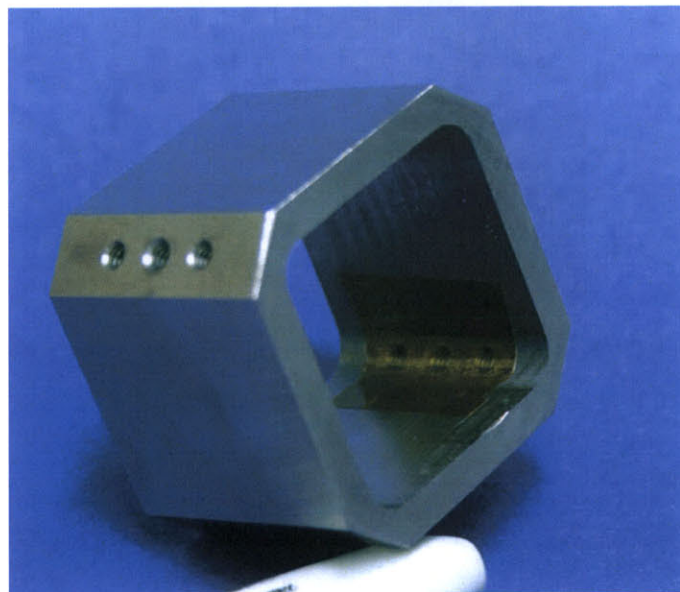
Shows the layer of tape used to seal the coil slot during potting.
